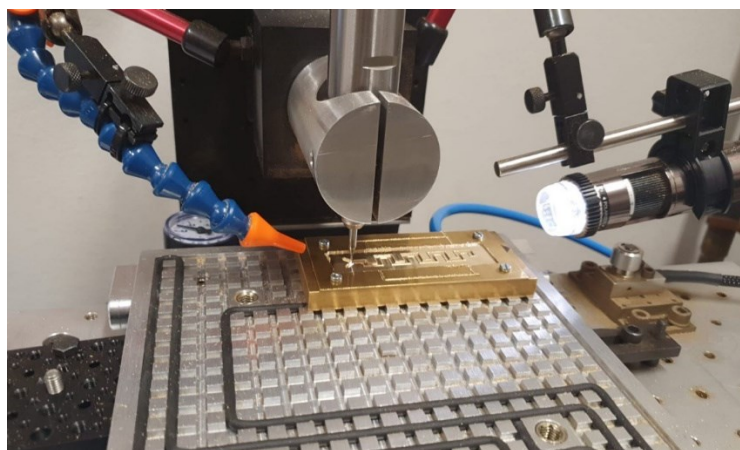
micro-milling machine hollowing out the chip from the brass sheet.
